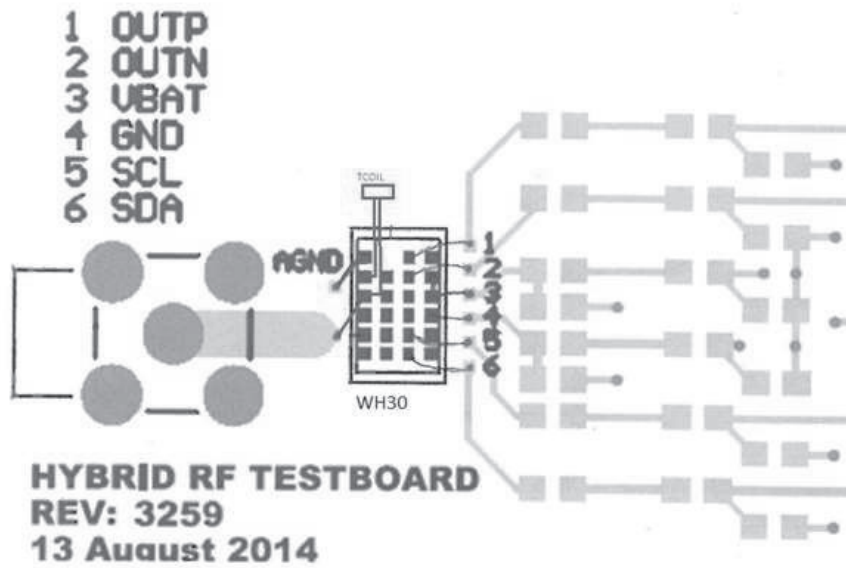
Hybrid test board with TCOILN&P connection on PCB layout.
